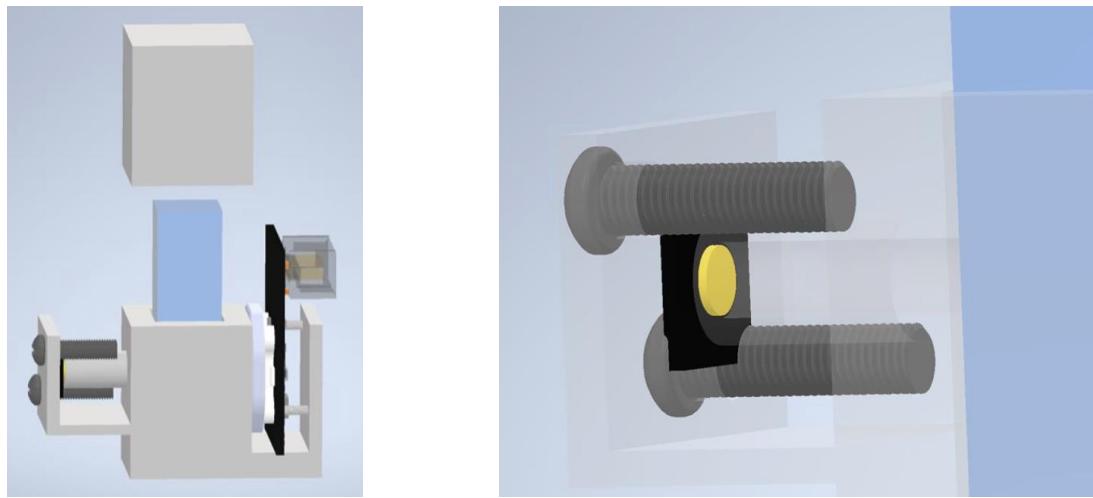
CAD model of device (left) with close-up of LED mounting (right).
